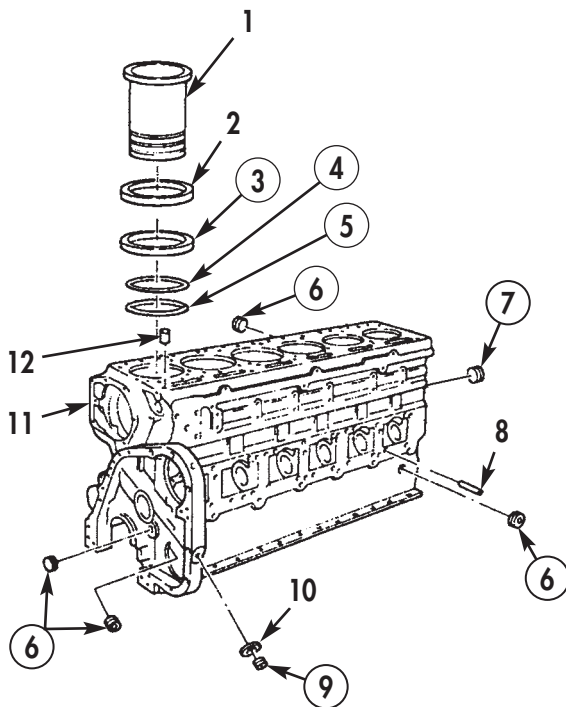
Cylinder Block Disassembly, Clean, and Inspect.
